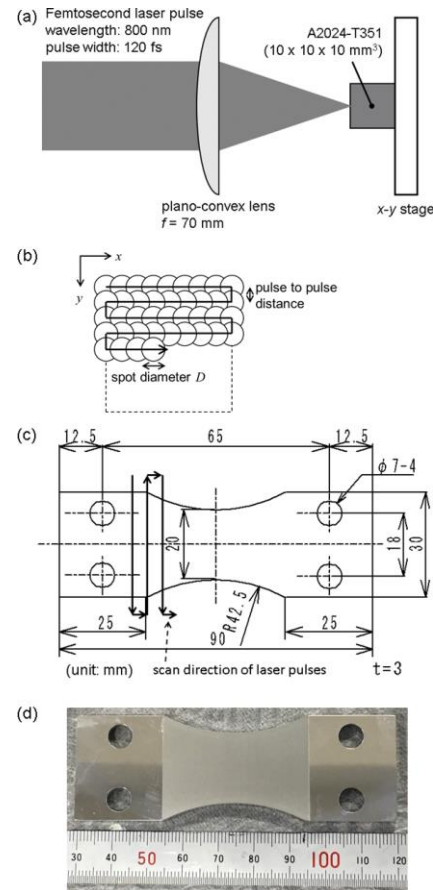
Schematic illustrations of (a) the experimental setup for laser irradiation, (b) the scan direction of laser pulses for the setup shown in (a), and (c) shape and dimensions of fatigue test specimens and scan direction of laser pulses for fatigue specimens. Picture of fatigue test specimen corresponding to (c) is shown in (d).
